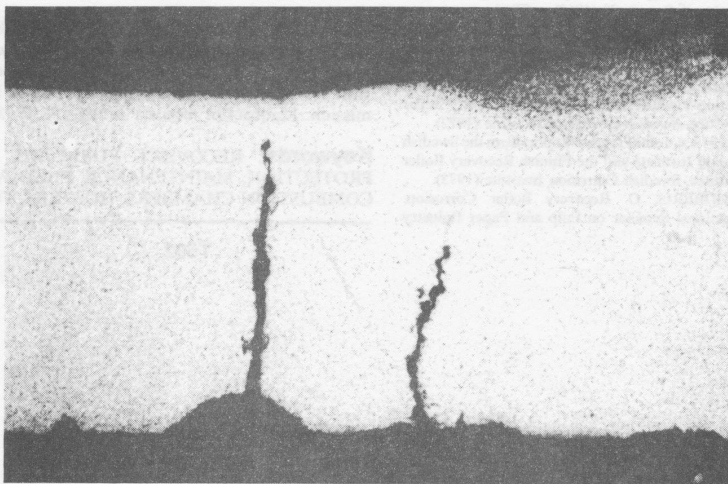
Corrosion cracks near weld to header. Note corrosion pits.
